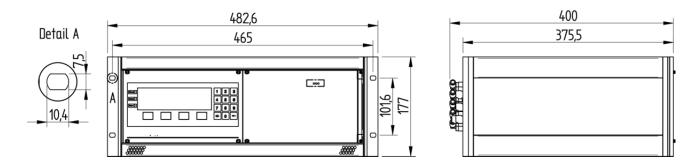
Dimensions in mm of the 19" 4HE electronic unit
